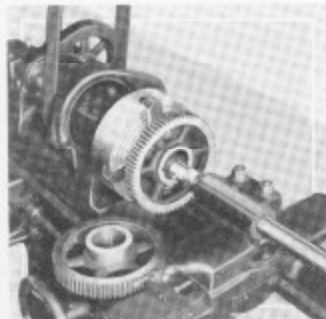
An Emergency Job, Key-seating a Gear in the Lathe, held in an Independent Chuck
